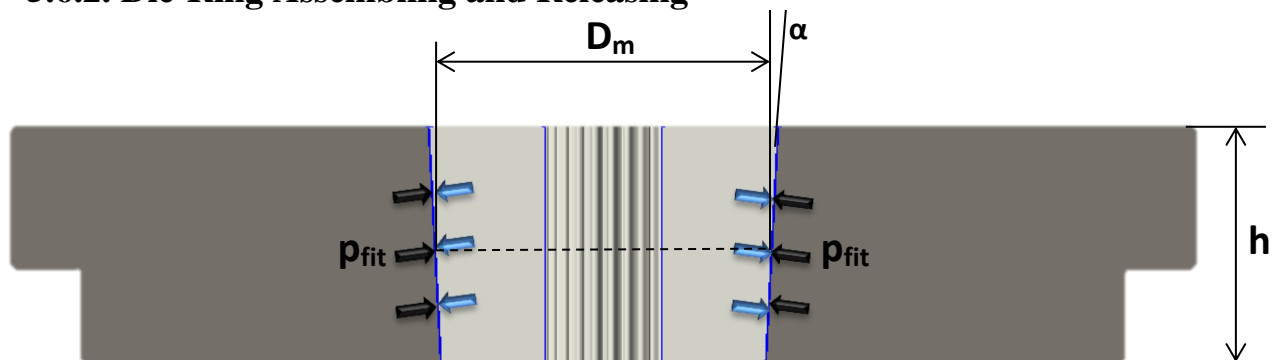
Main geometrical sizes related to the die-ring assembly.
